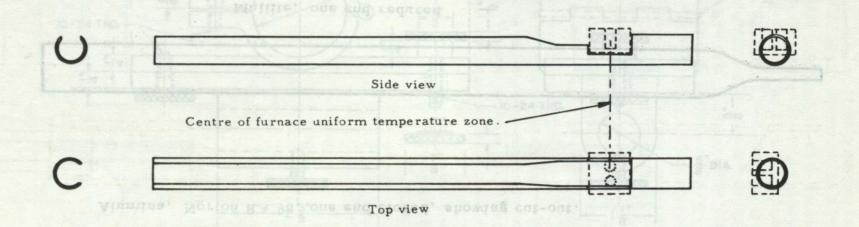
Carrier for sample holder and thermocouple assembly. (Refractory tube, 3/4-in. O.D., cut as indicated.)
